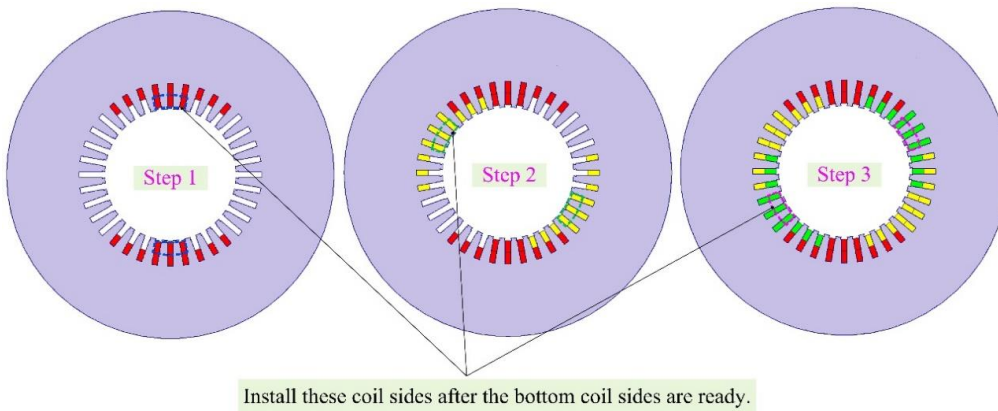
Asymmetric winding arrangement and its assembly sequence (adapted from Publication IV).
